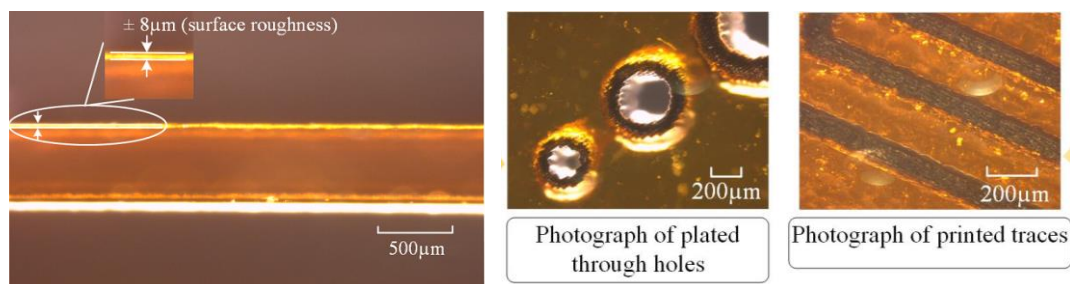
Photograph of (a) printed substrate - cross-sectional view. (b) plated through holes and (c) printed traces.
